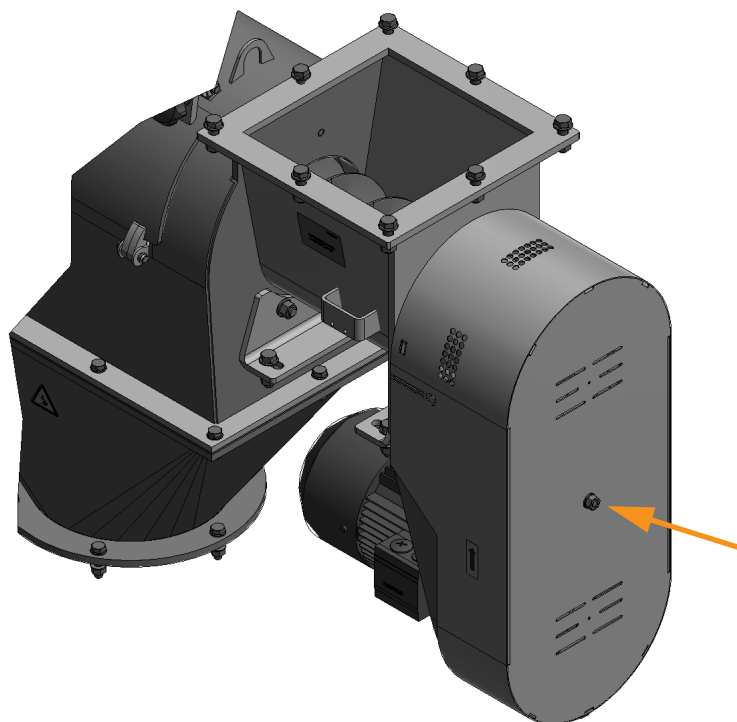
Bearing housing (drive side): Remove bolts on protective plate.
